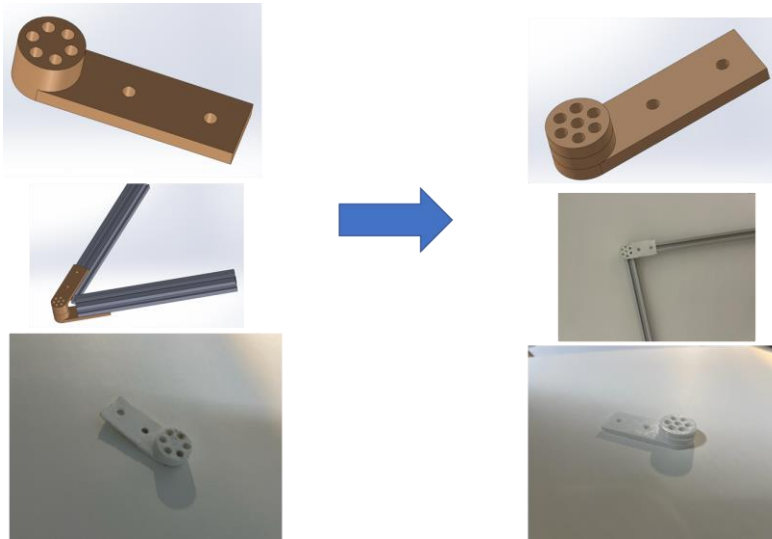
Reconfigurable bracket to assemble extrusions at multiple angles
